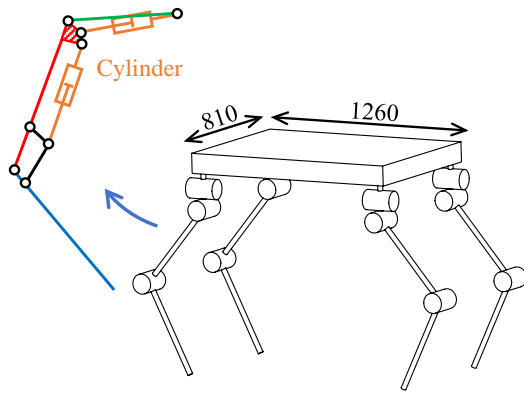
Joint arrangement and leg mechanism of Tough Runner.
